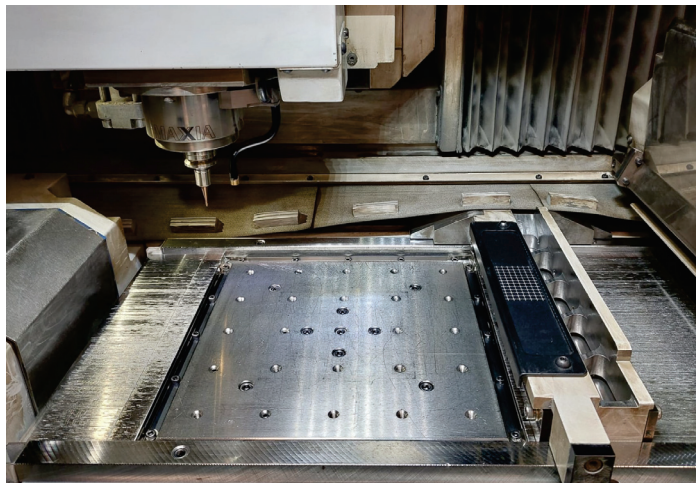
Hybrid additive manufacturing unit, showing the build plate with the recoater and the milling spindle.
